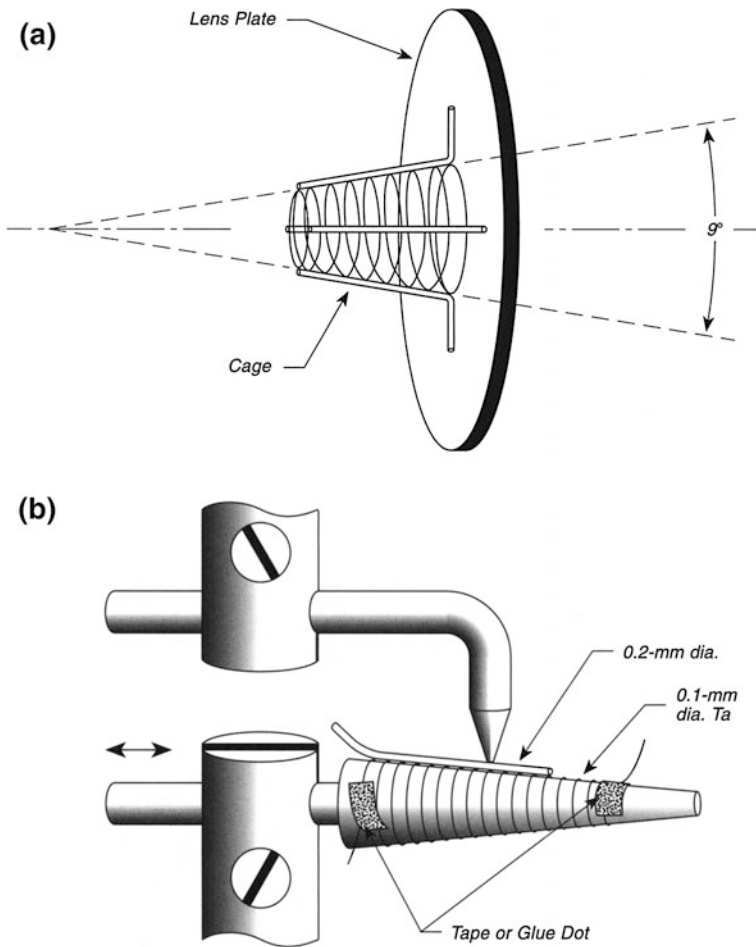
Grid fabrication techniques—conical grid. a Conical grid. b Mandrel + spot-welding
